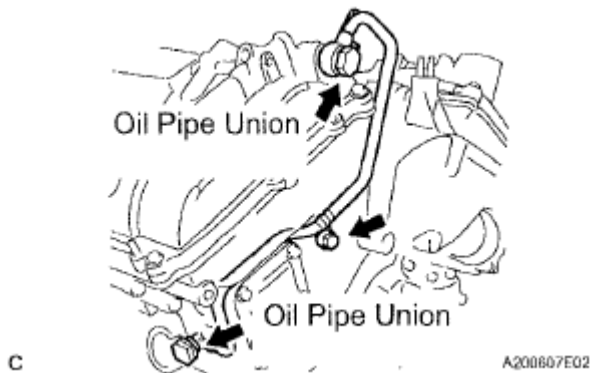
Locating Oil Pipe Unions And Oil Pipe
